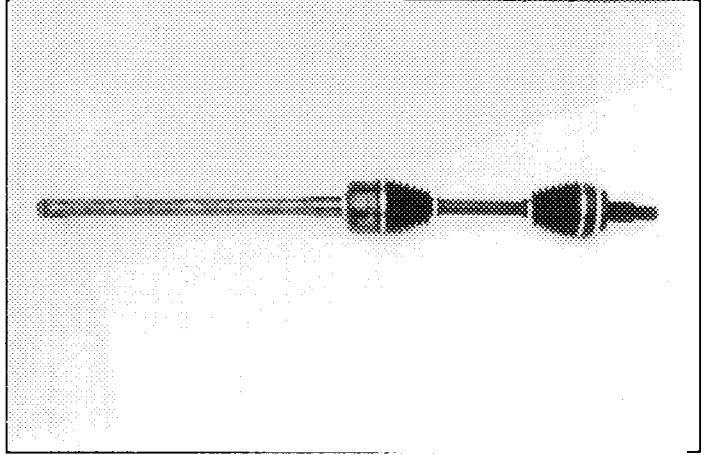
Reinforced drive shaft front right TYPE C
